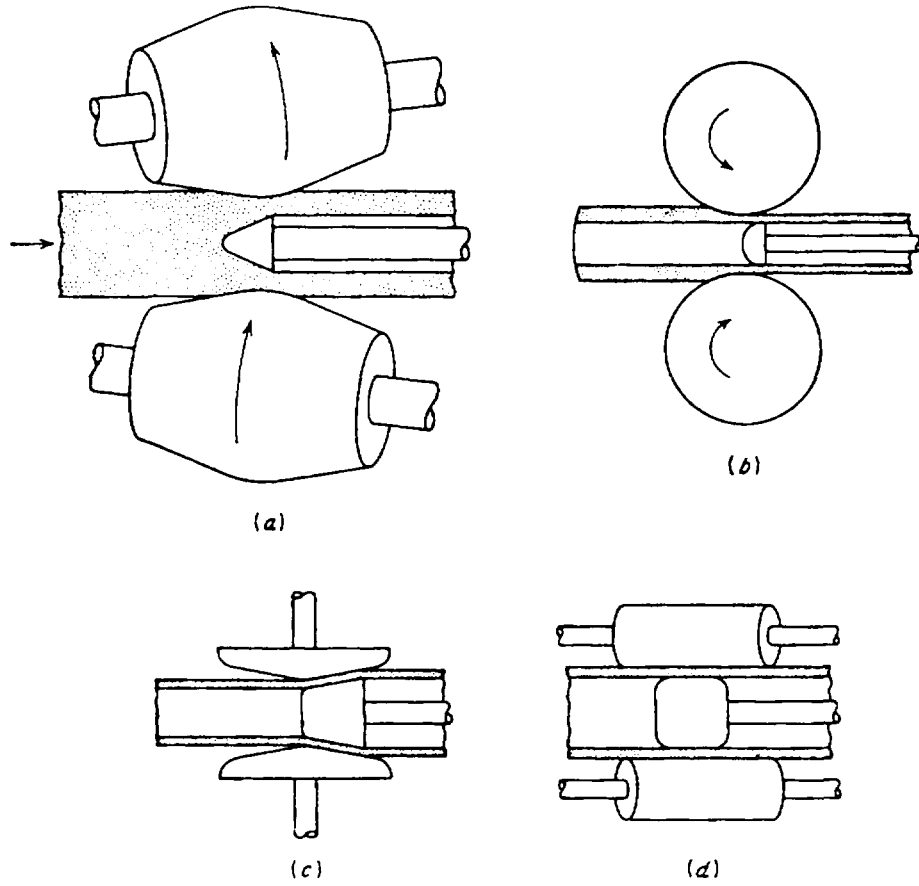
(a) Mannesmann mill, (b) plug rolling mill, (c) three-roll piercing mill, (d) reeling mill.
